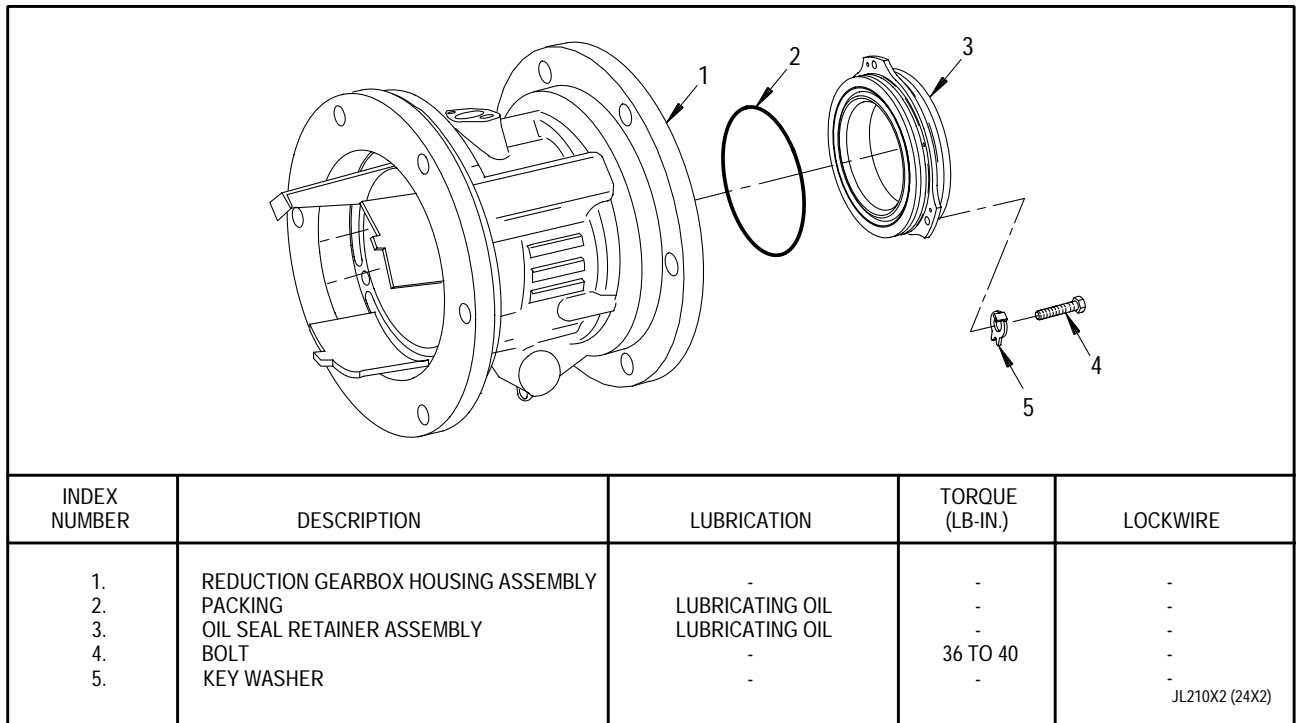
Reduction Gearbox Oil Seal Retainer - Assembly
